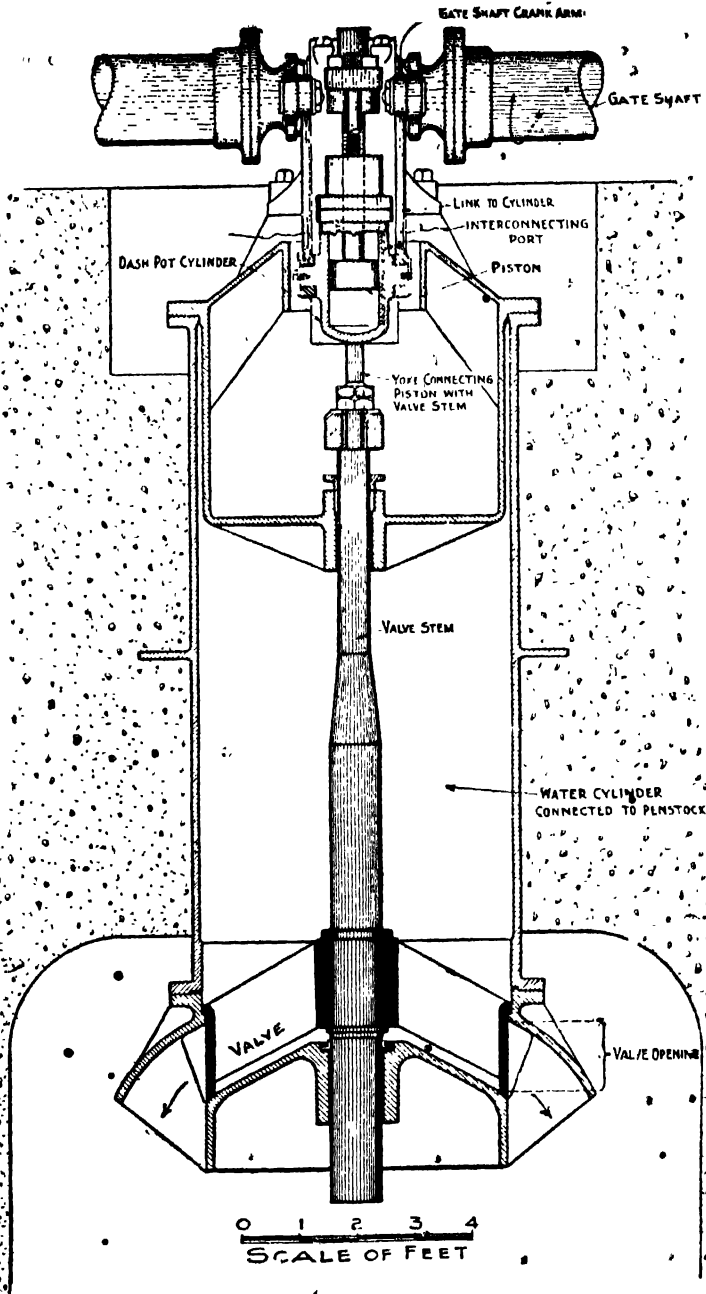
Relief Valve for 20,000 h.p. units of Shawenegan Water and Power Co.
